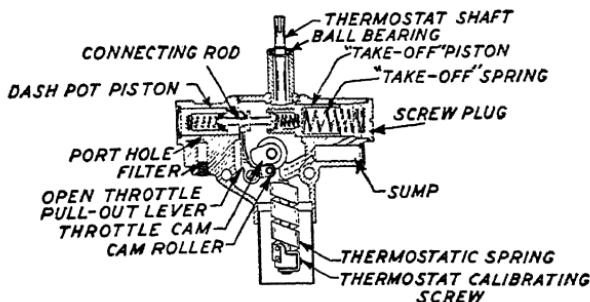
Sectional View of Delco-Remy Carburetor Control Showing Pistons
